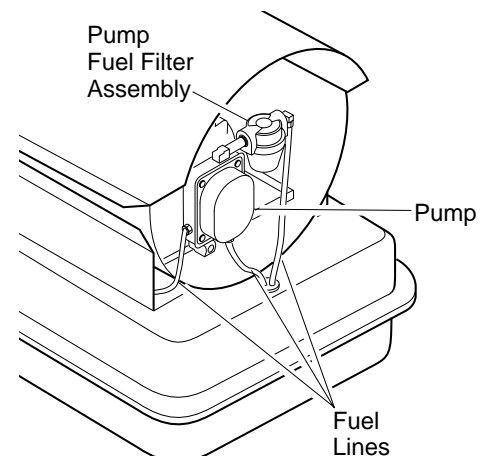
Fuel Lines at Pump and Pump Fuel Filter Assembly
